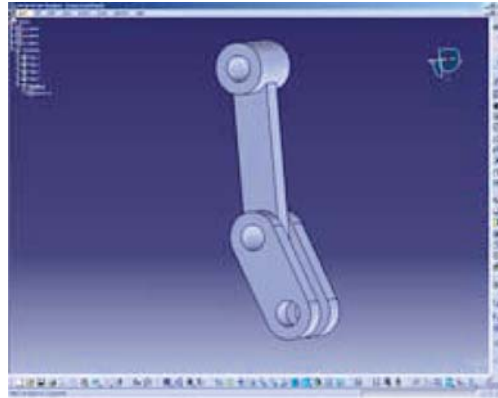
CAD – 3D model of the hydraulic bending machine subassembly.
